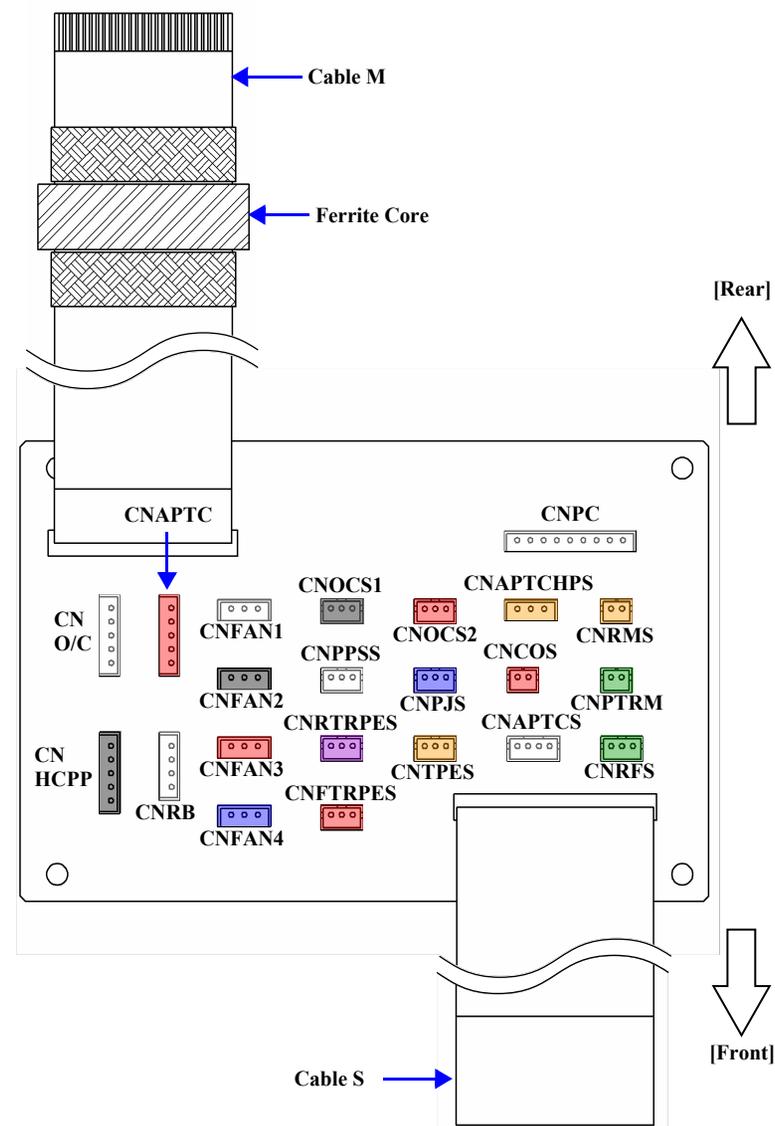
SENSOR BOARD UNIT Removal (1)
